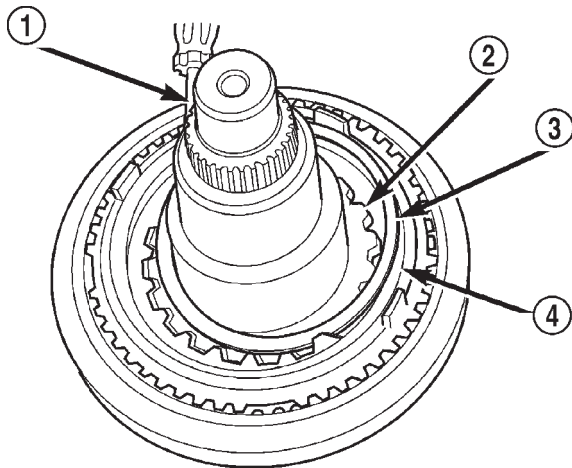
Second Gear Clutch Cone, Clutch Ring And Stop Ring
